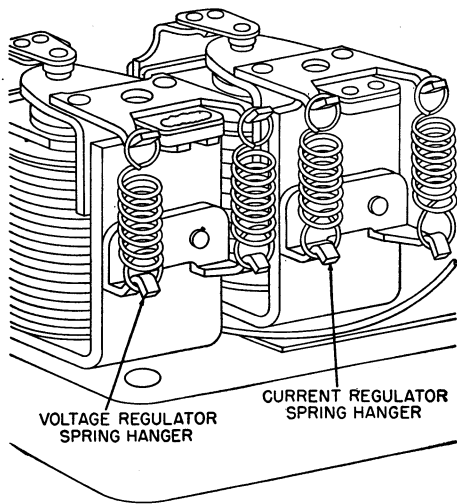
Setting is adjusted by bending spiral spring hanger of one spring
